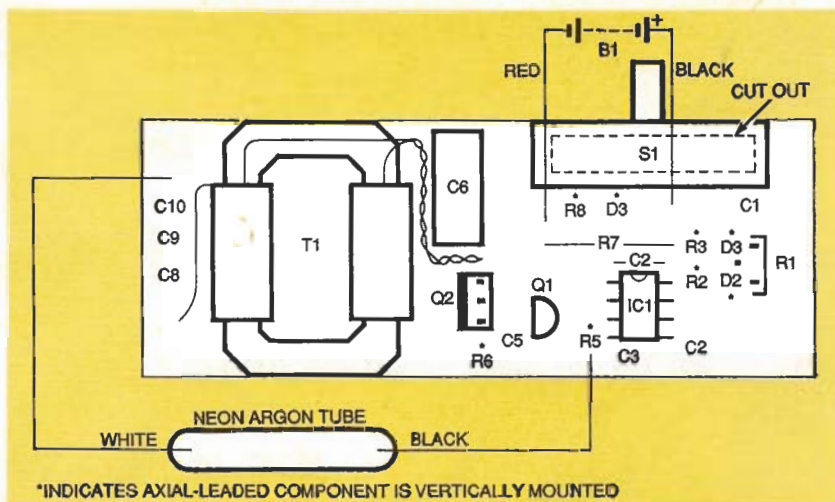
DRIVER CIRCUIT PARTS PLACEMENT DIAGRAM. The circuit can be built by point-to-point wiring on 0.1-inch grid perforated board. Transformer T1 is a non-standard component.
